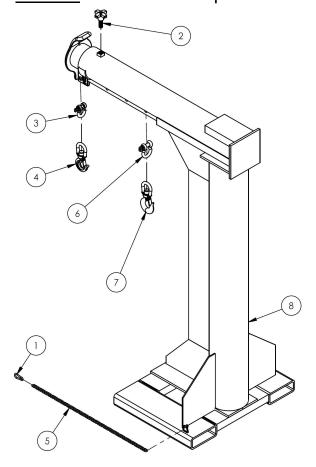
A: LM-HRT-4k Exploded Parts Diagram & Bill of Materials
